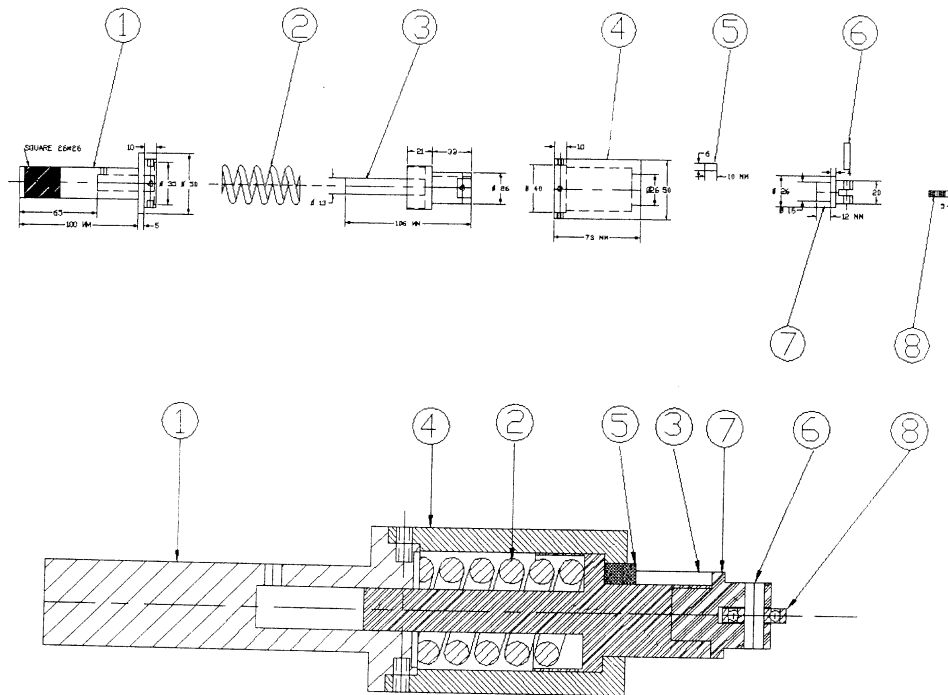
Detailed and assembly drawings for the roller-burnishing tool [10] (1) shank; (2) calibrating spring; (3) tool stem; (4) casing; (5) key; (6) pin; (7) roller holder; (8) burnishing roller.
